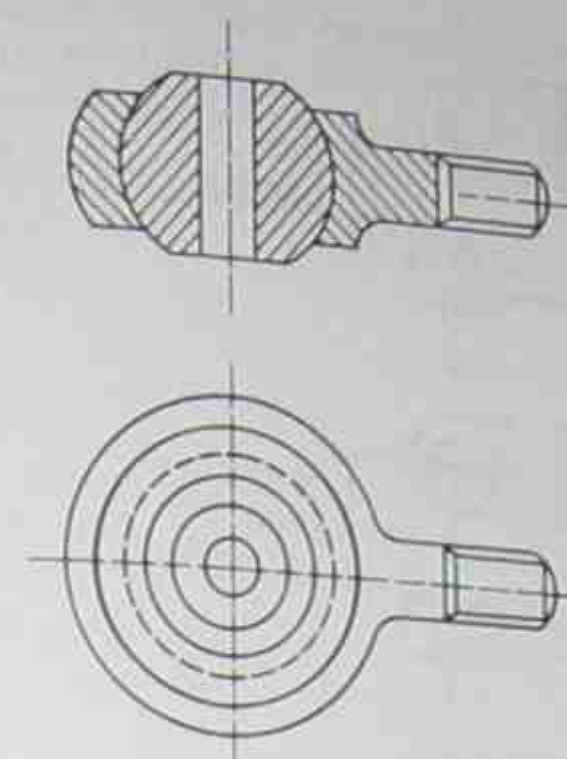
Universal ball joint made by casting a zinc alloy housing around a steel ball.
